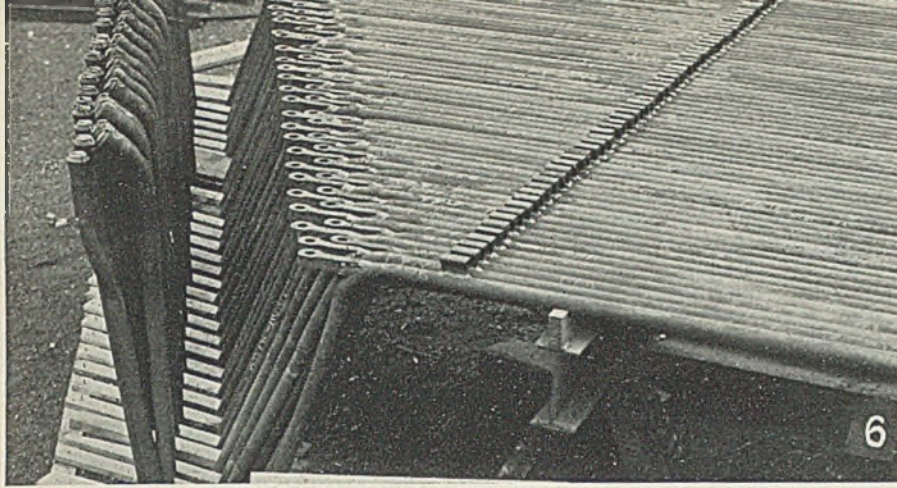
Tubes with ends flanged for field welding and with supports attached
